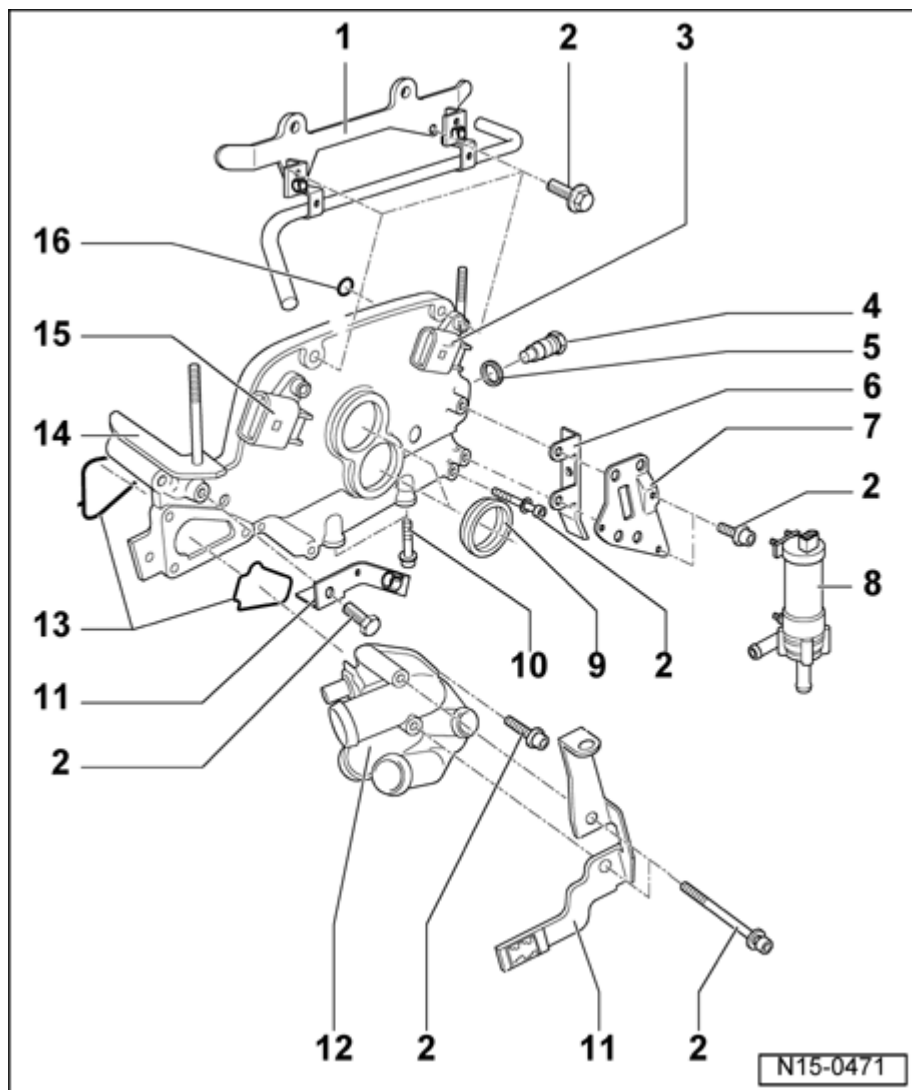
Upper Cover For Camshaft Timing Chain, Component Overview
